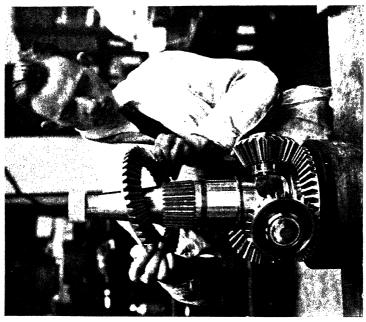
ASSEMBLING FRONT BEVEL GEAR.
